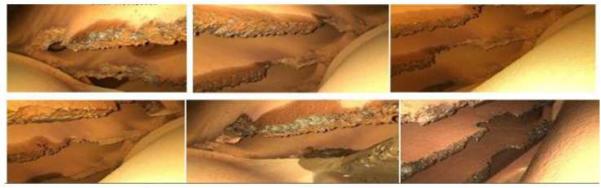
Damages in Inner blades of vacuum pump rotor due to cavitations.
